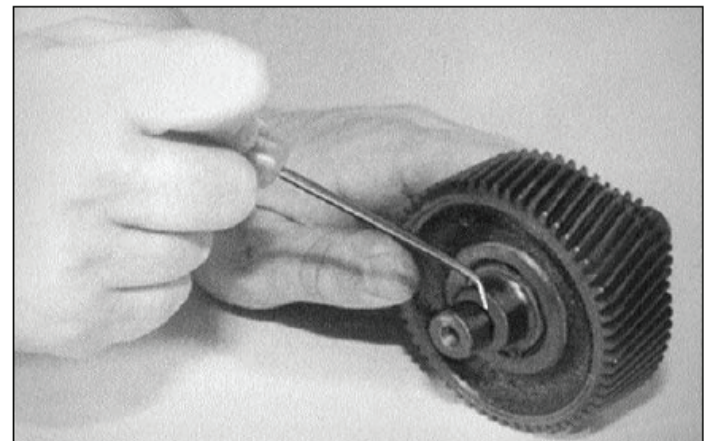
Removing O-rings from Intermediate Shaft & Gear
